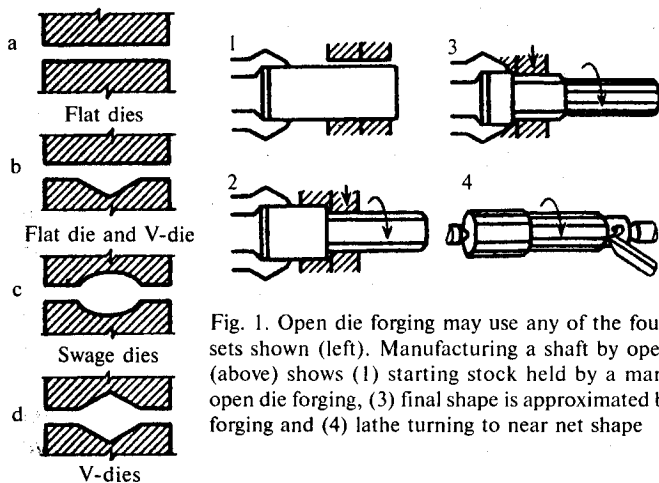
Open die forging may use any of the four types of die sets shown (left). Manufacturing a shaft by open die forging (above) shows (1) starting stock held by a manipulator, (2) open die forging, (3) final shape is approximated by progressive forging and (4) lathe turning to near net shape
